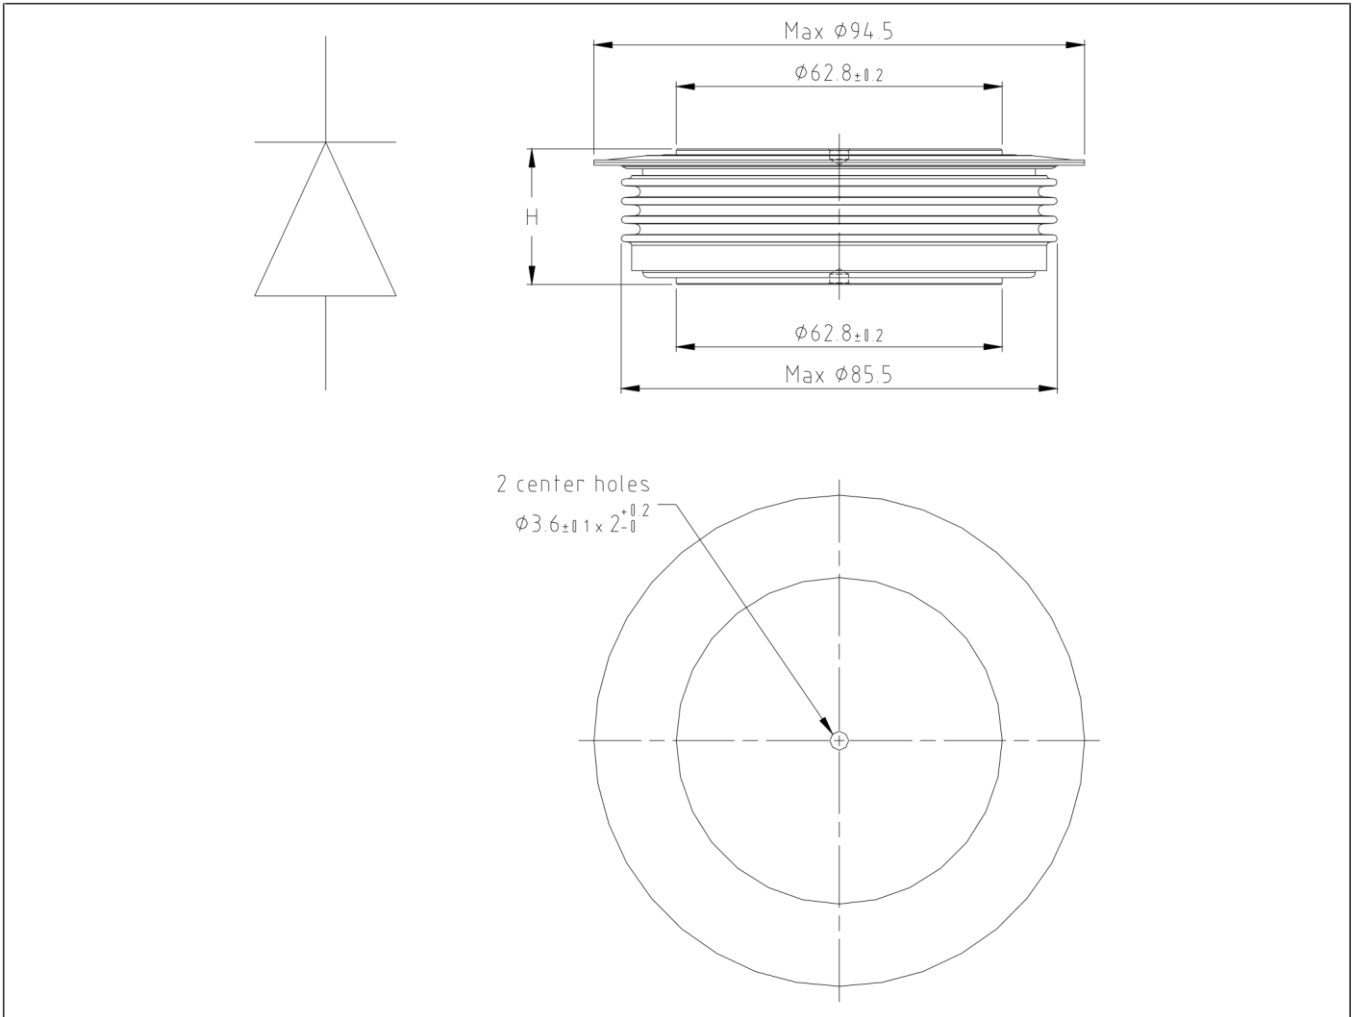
Outline drawing, all dimensions are in millimeters and represent nominal values unless stated otherwise
